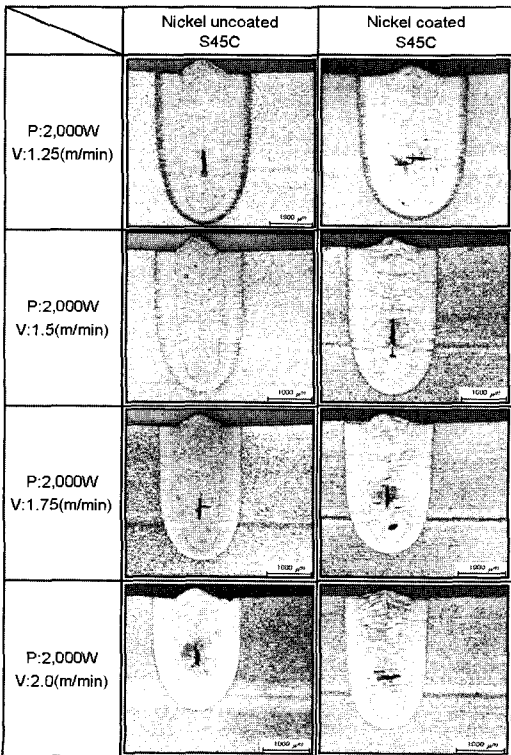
The cross-sections of welding speed(BOP)
